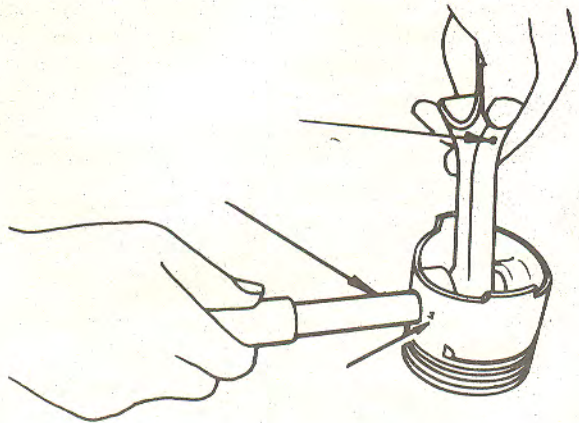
Installation of the piston pin with the special tool. Ensure that the "F" mark on the piston and the oil hole in the connecting rod are as shown.
